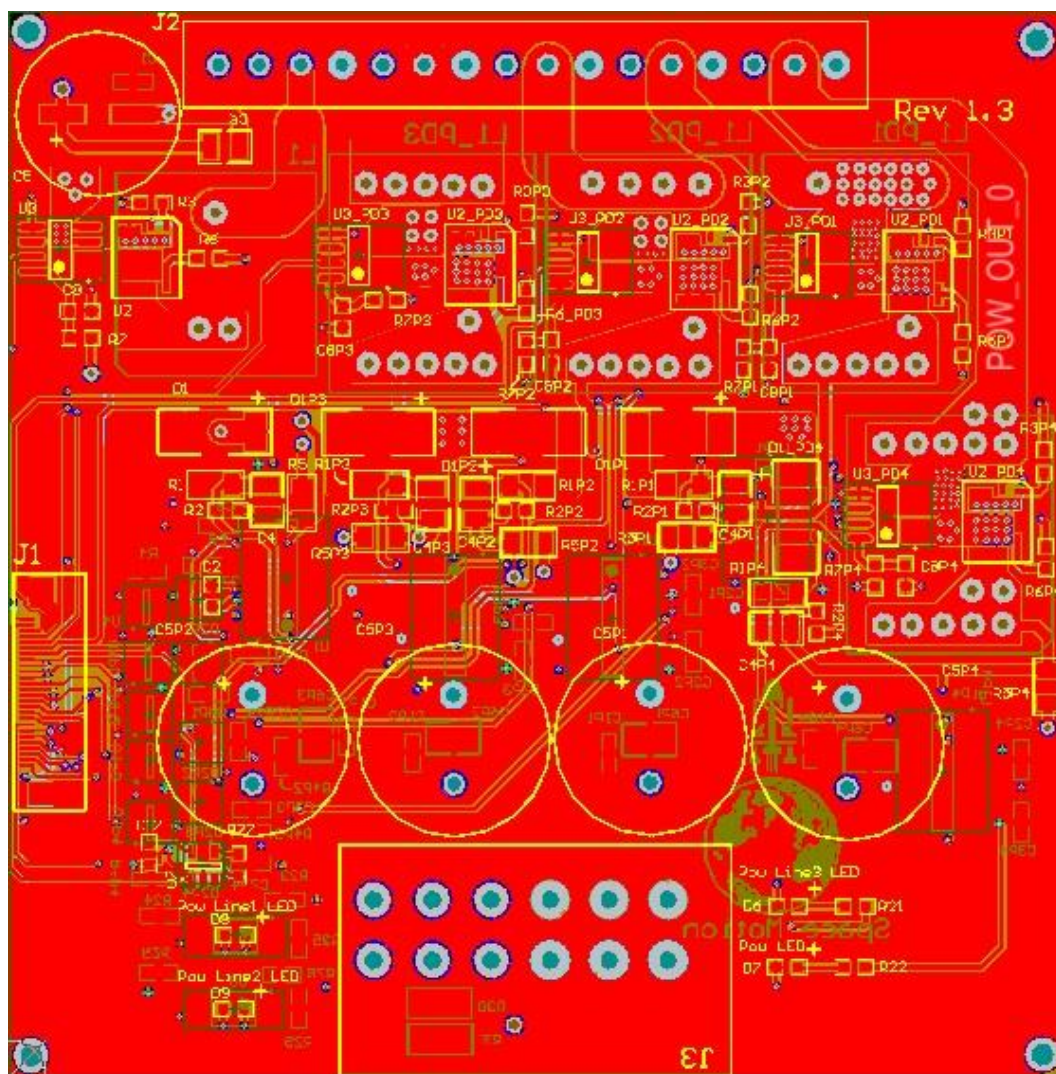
ALL PCB Layers of 1C601 Power Driver Board
